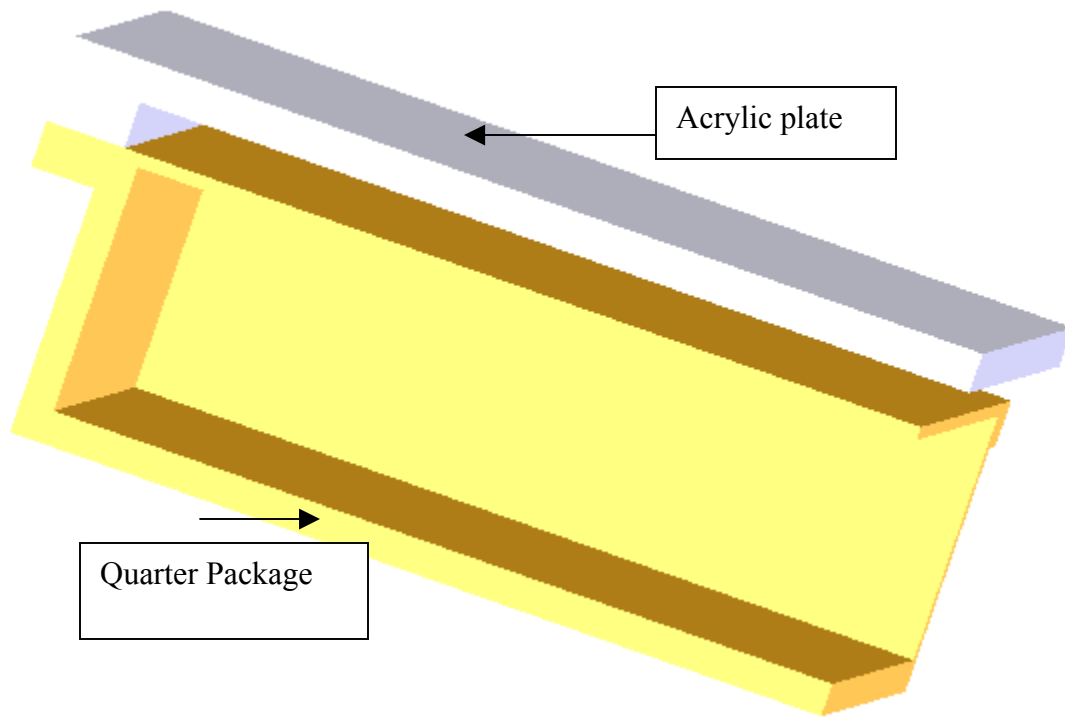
Three dimensional drawing of a quarter package with acrylic plate in Solidworks[®].
